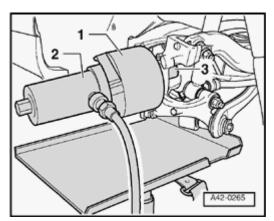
Attaching Bell, Hollow Piston Cylinder With Tie Bolt And Special Nut Courtesy of VOLKSWAGEN UNITED STATES, INC.
